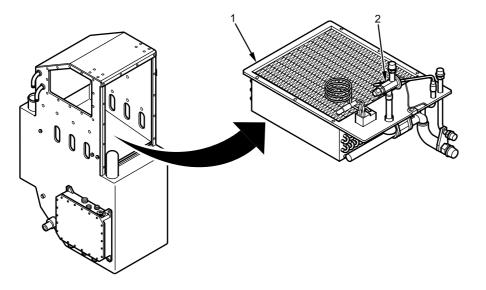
Thermal Expansion Valve (TXV) and Evaporator Assembly.
